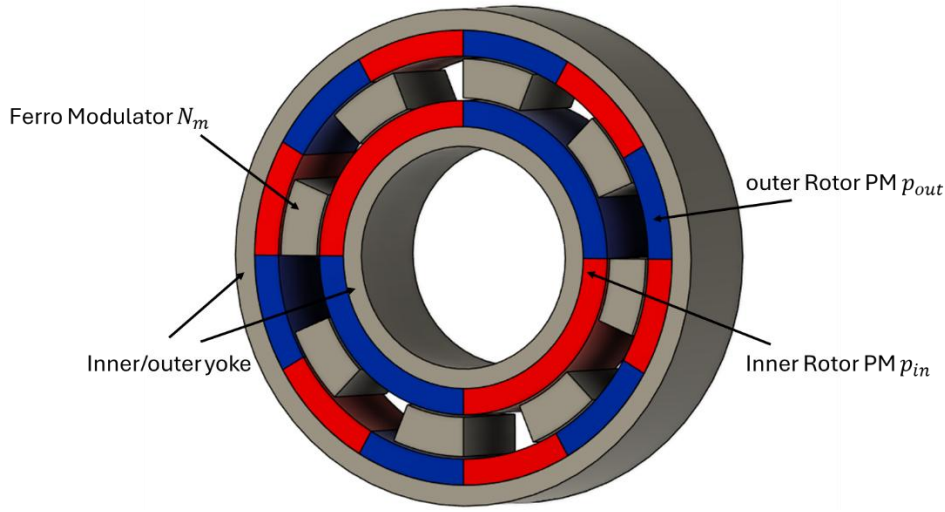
Concentric Magnetic Gear (CMG) inner rotor to outer rotor 1:3 gear ratio.
